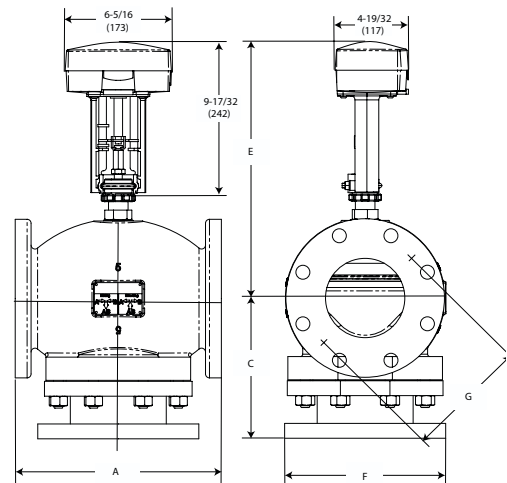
M1500A Series U-Bolt-style with VB-8303 Flanged 3-Way Globe Valves
